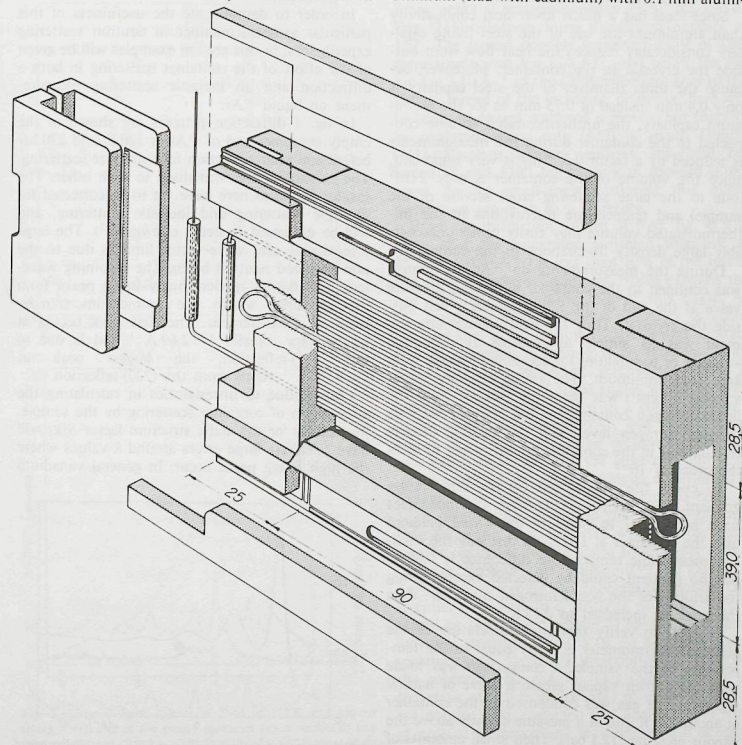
Drawing of the assembly of the complete container. The upper and lower bar of the frame contain grooves for sensors for temperature control and measurement. Dimensions are in mm.
